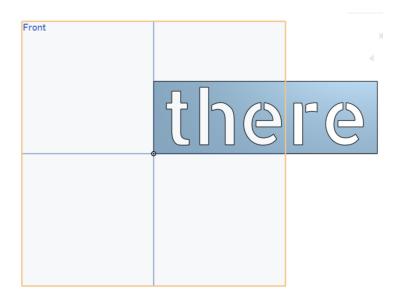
Front Onshape Drawing of Stencil 2 "there" design
